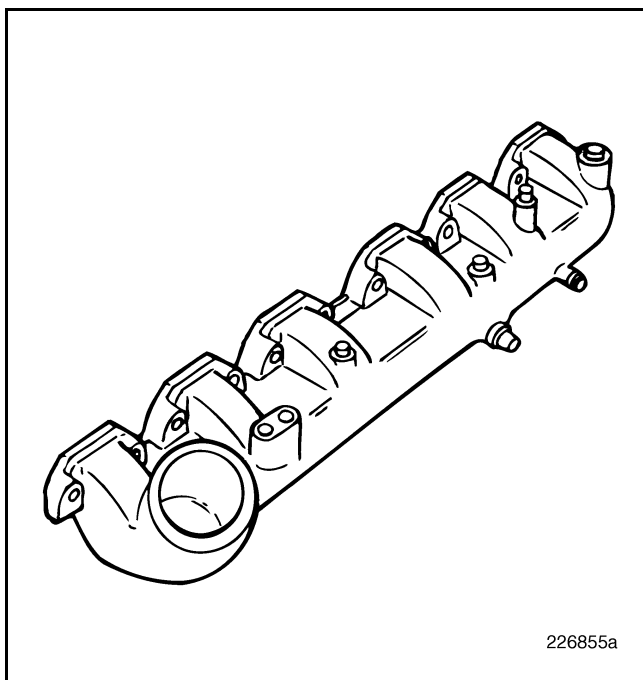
One-Piece Air Inlet Manifold (Current Production)
